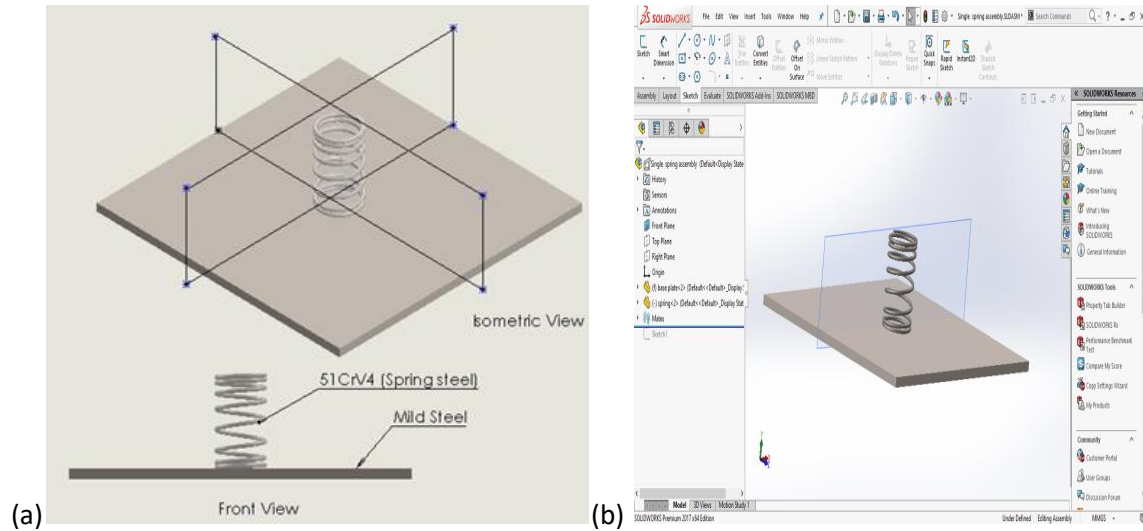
single helical (a) single spring steel, and (b) single alloy-steel
